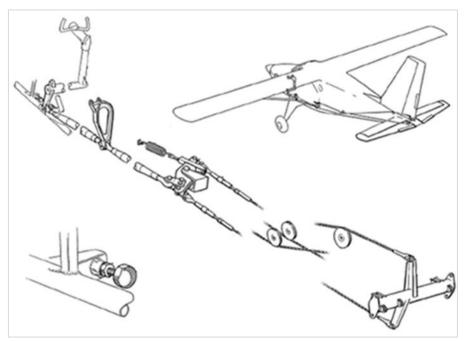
Principle sketch of the elevator control system. Drawing: Viking Air Limited.
